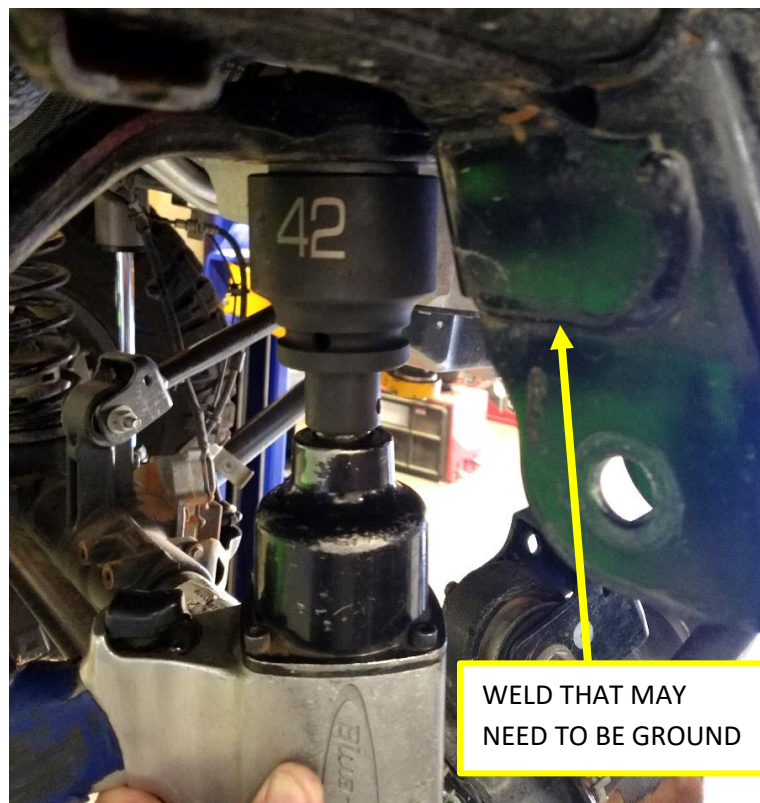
Removing Pitman Arm Nut and Weld That May Need to be Ground Flush.
